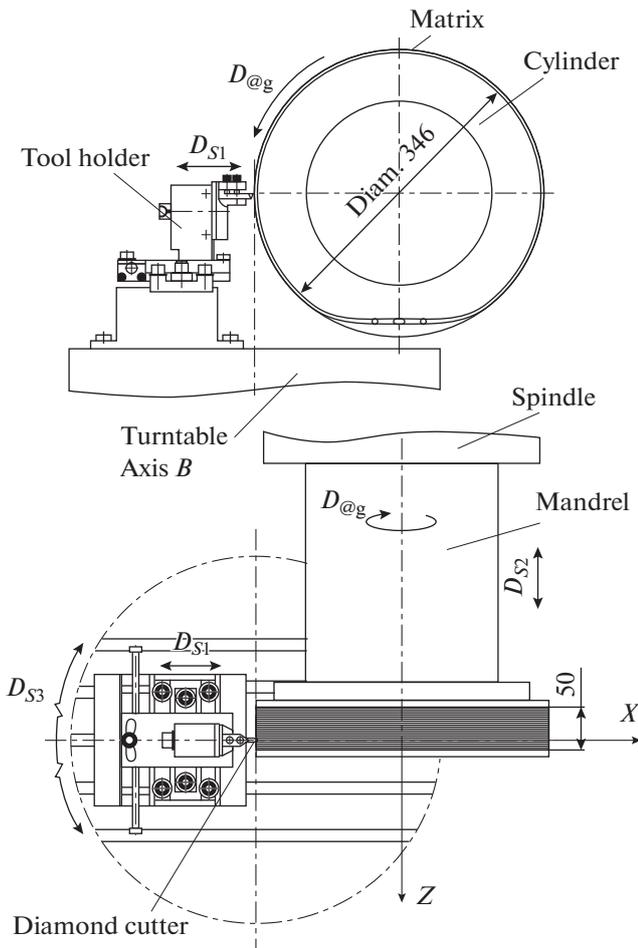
Machining system for matrices used in the manufacture of Fresnel lenses.
